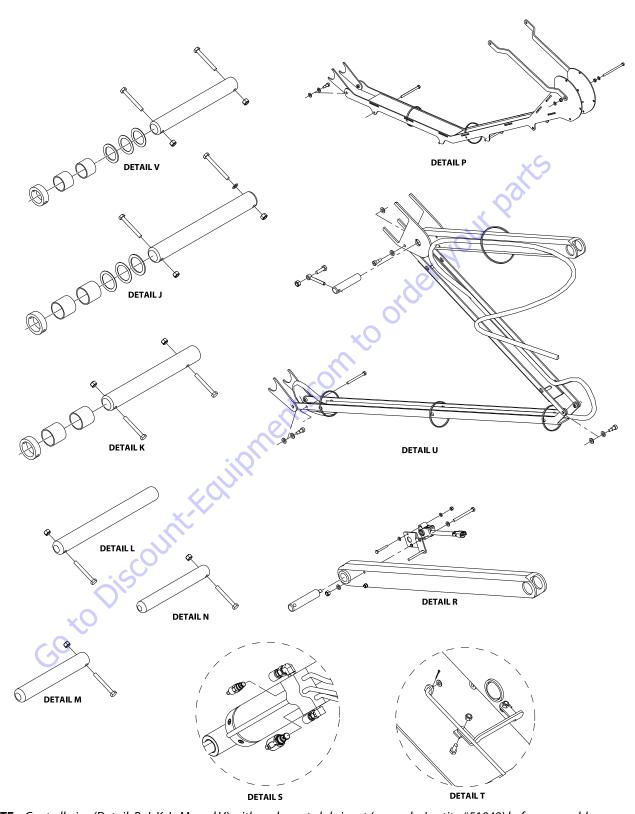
Scissor Arm - Hose and Wiring Routing.
